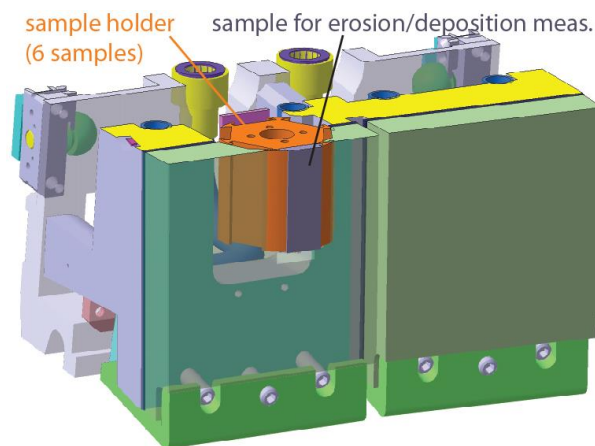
CAD model of the rotatable sample holder for 6 T-shaped samples. The sample holder will be driven by an external motor. Position control and fixing is realized at the sample holder.
